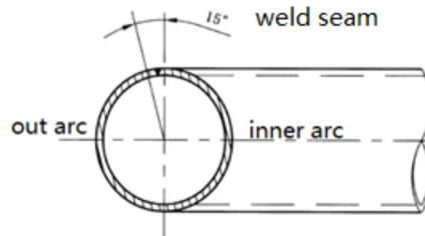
Longitudinal weld arrangement
